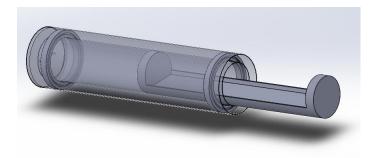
Isometric View of Projected Payload Tube and Sled Assembly (SolidWorks)
